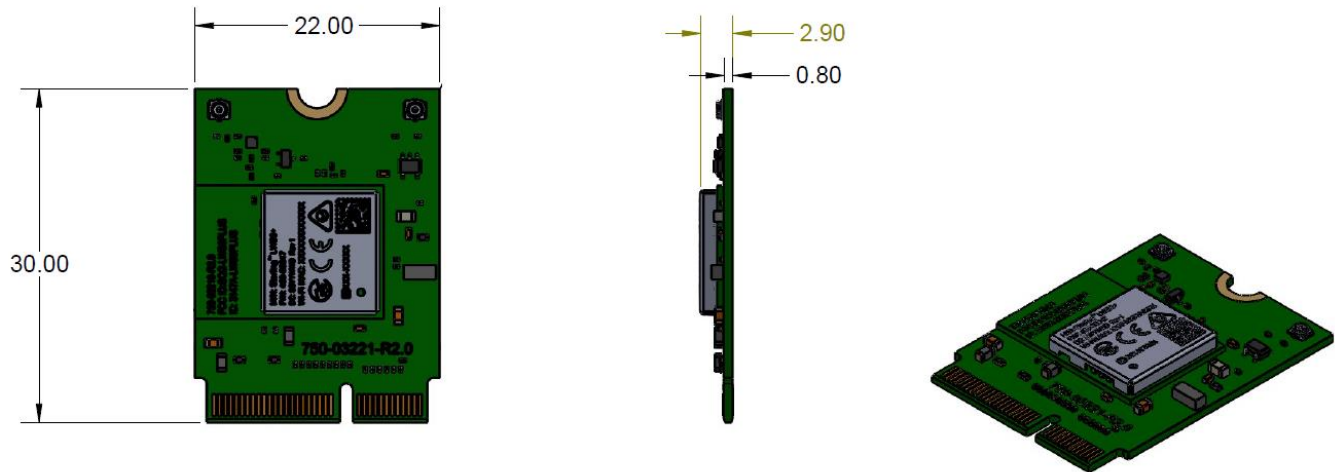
Module dimension of LWB5+ M.2 module – Top View
